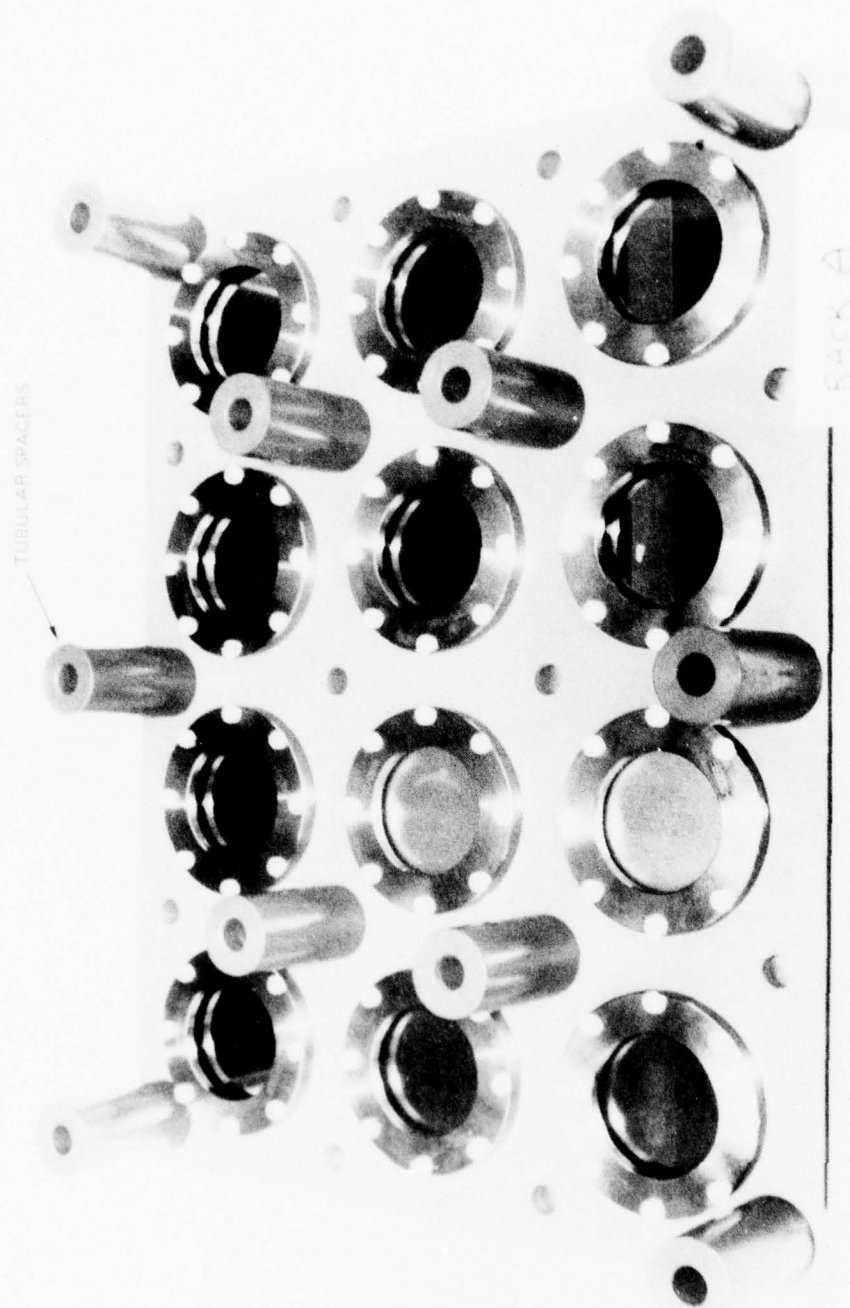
Multiple specimen fixture A in process of assembly, showing tubular spacers through which connecting studs pass.
